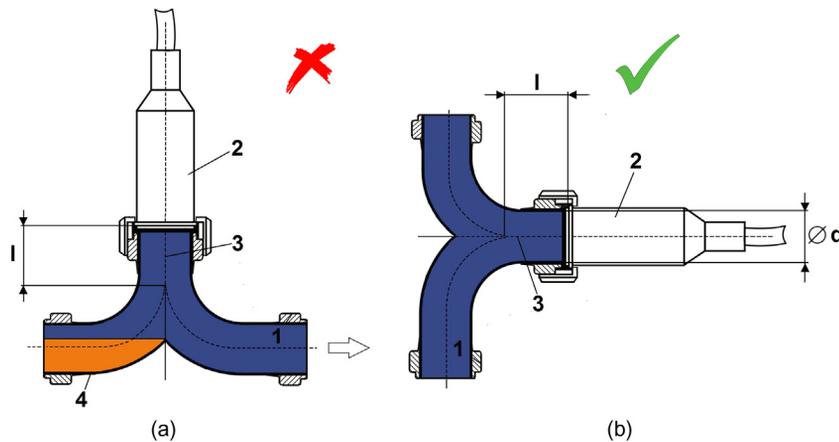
Incorrect mounting of sensors (2) in process lines (1) may give rise to tees with closed ends (3) that if too long will result in large dead areas. (a) But a swept tee if mounted in a horizontal pipeline may impede drainage (4). (b) Swept tees should be mounted in a vertical pipeline. Dimension l must be as short as possible relative to dimension d , maximum $l = d$ (Lelieveld et al., 2003; Hauser et al., 2007).
